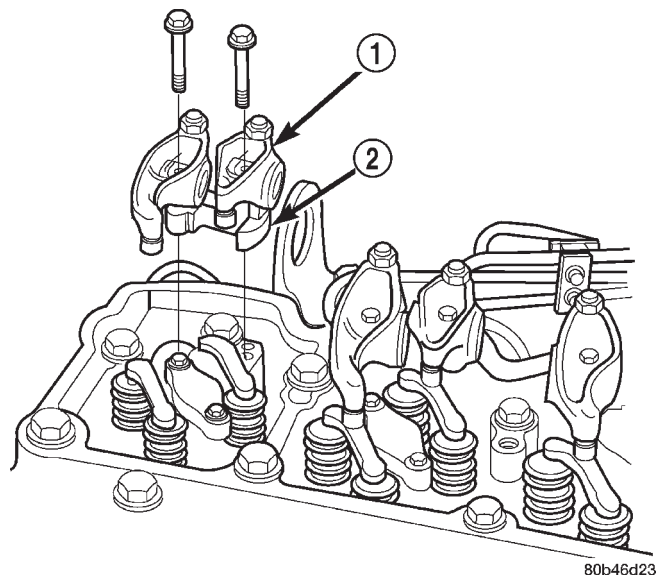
Rocker Arm and Crosshead Removal/Installation
